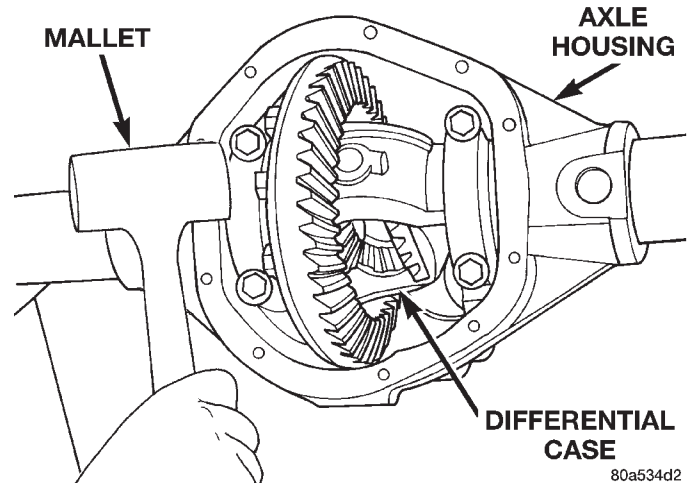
Seat Pinion Gear Side Differential Dummy Side Bearing—Typical
